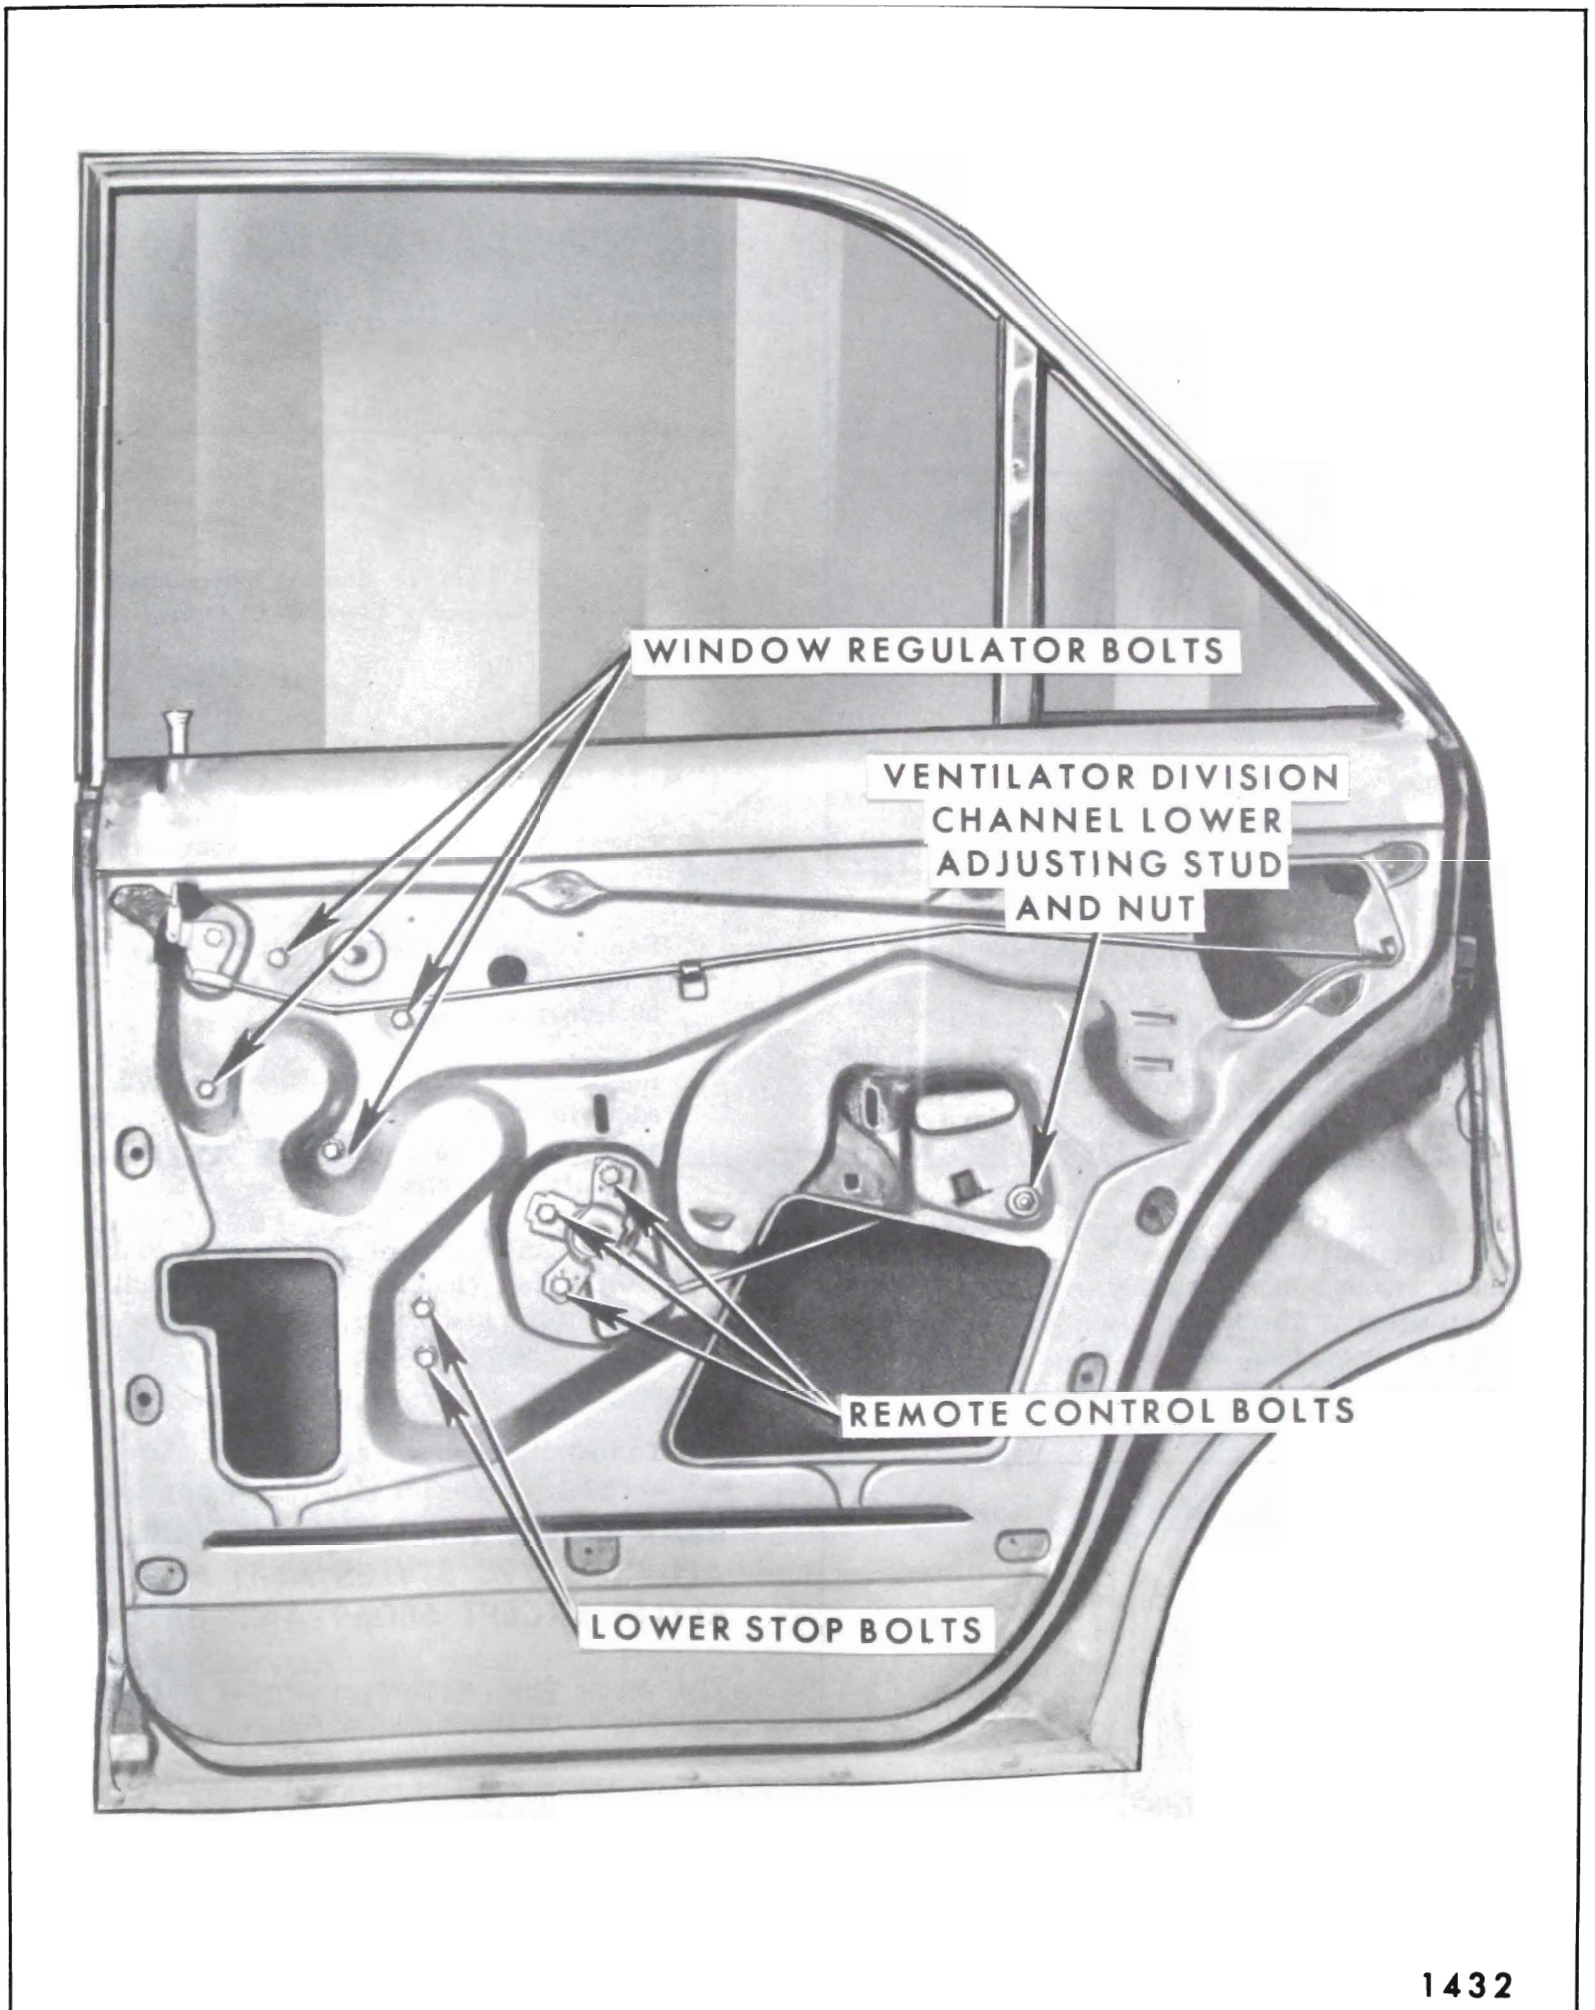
Rear Door Hardware - "X-35 and 69" Styles
